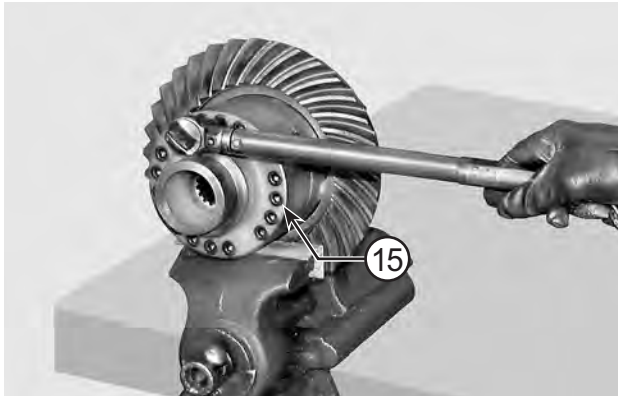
Fit the complete differential unit in a vice and tighten the screws (15) holding the two half boxes together to a torque of 71.5 - 78.5 N-m.
